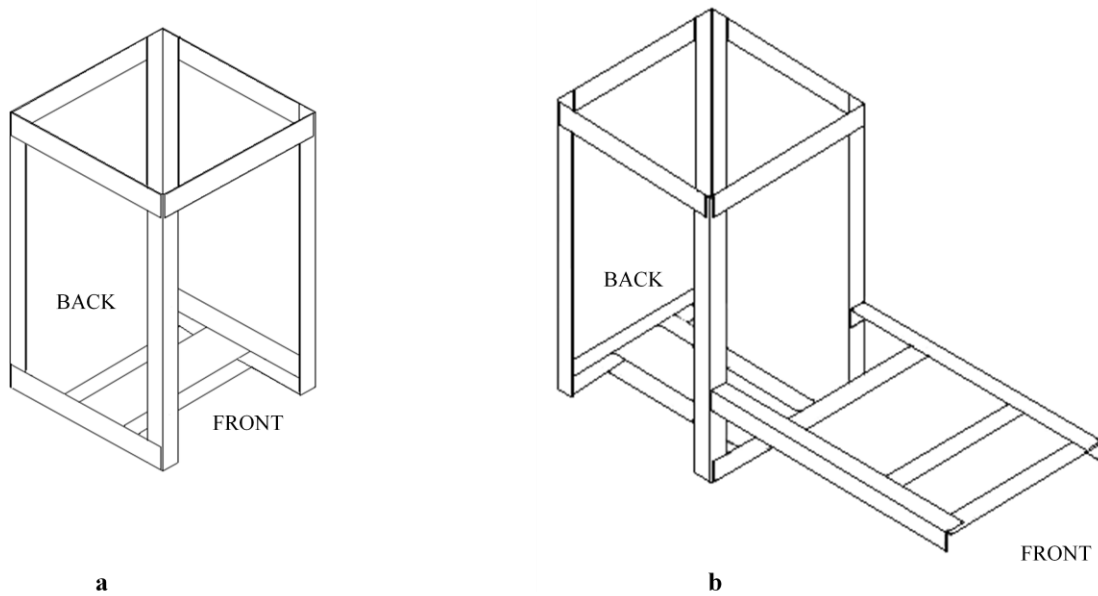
The holding bin base fabricated from 3.81 cm steel flat stock and angle stock. The base (a) stood 55.9 cm tall and had a square cross sectional area, 33.6 cm x 33.6 cm, the assembled assembled base (b) included a horizontal bracket for the motor and gear assembly.
